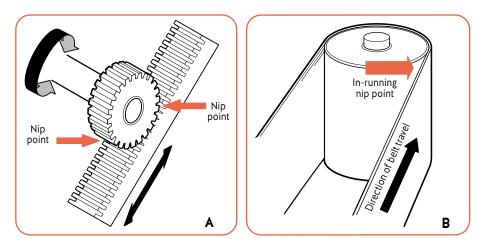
Combination of rotating and sliding parts and reversing parts, creating two in-running nip point hazards. (A) Rack and pinion gears. (B) Conveyor belt spool.
